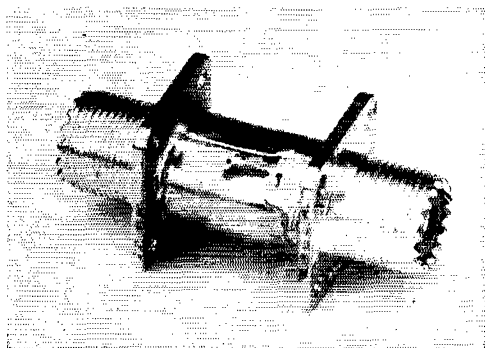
Emergency coax connector made from two SO-239 chassis fittings and a scrap of copper flashing.
